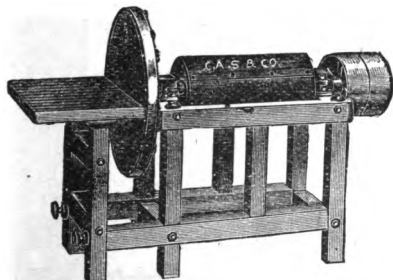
NO. 1 COMBINED DISC AND DRUM SANDER.
